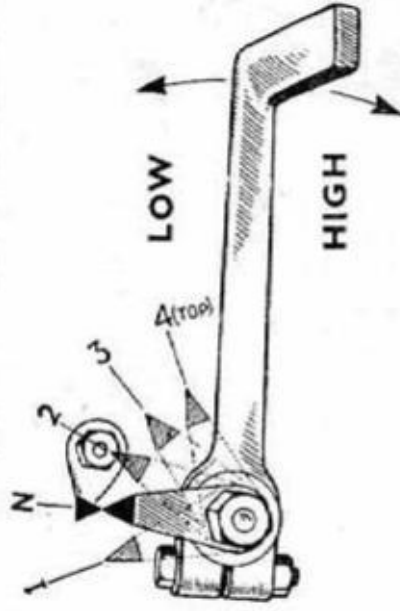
THE FIVE POSITIONS OF THE FOOT GEAR-CHANGE INDICATOR
